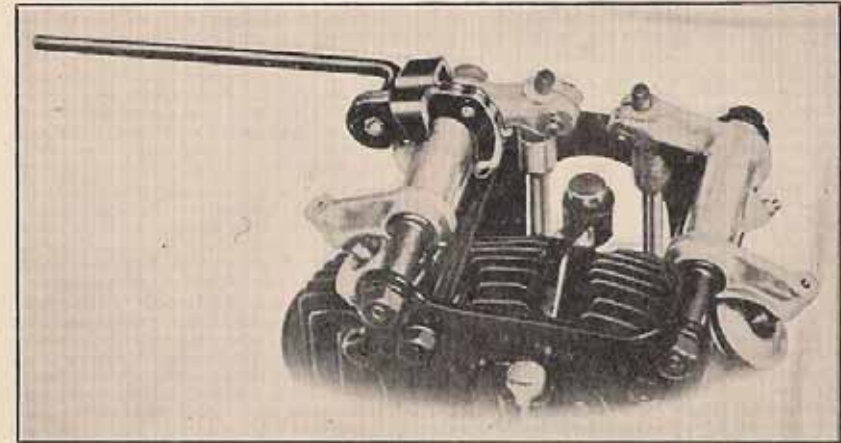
THE A.J.S. TAPPET TUBE EXTRACTOR
